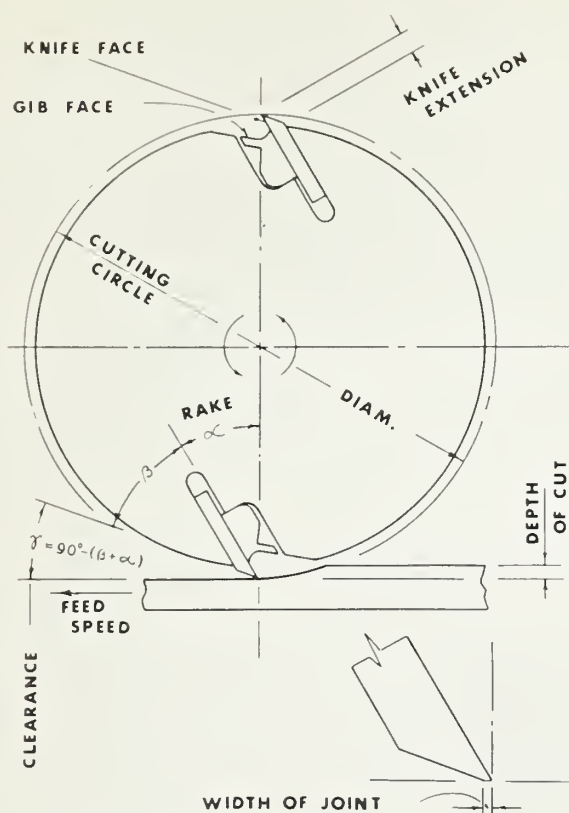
Terminology for peripheral-milling cutterhead. Up-milling illustrated (Koch, 1964b).
